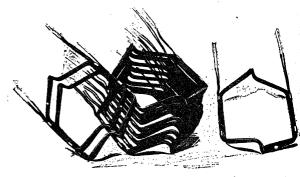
Form-Wound Coils Ready to be Taped Courtesy of the Reliance Electric and Engineering Company
